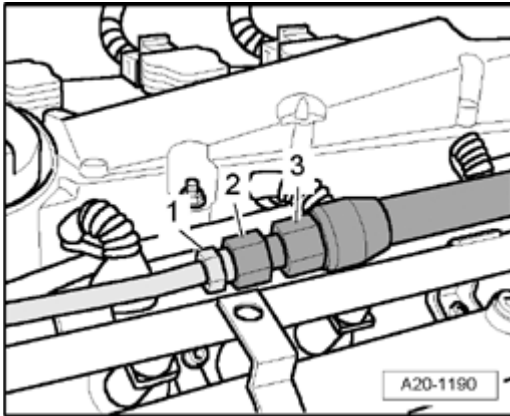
Counterholding Using An Open-End Wrench At Each Hex Head & Unscrew Union Nut
